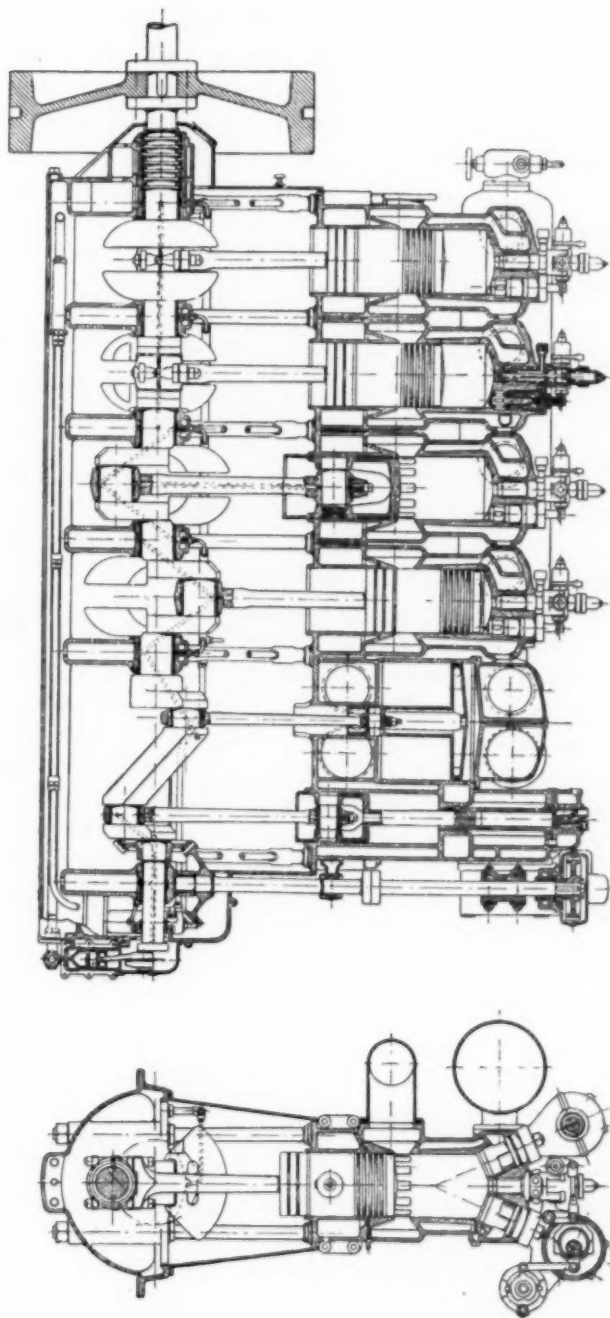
SECTIONAL DRAWING OF SULZER BROTHERS' TWO-CYCLE ENGINE
